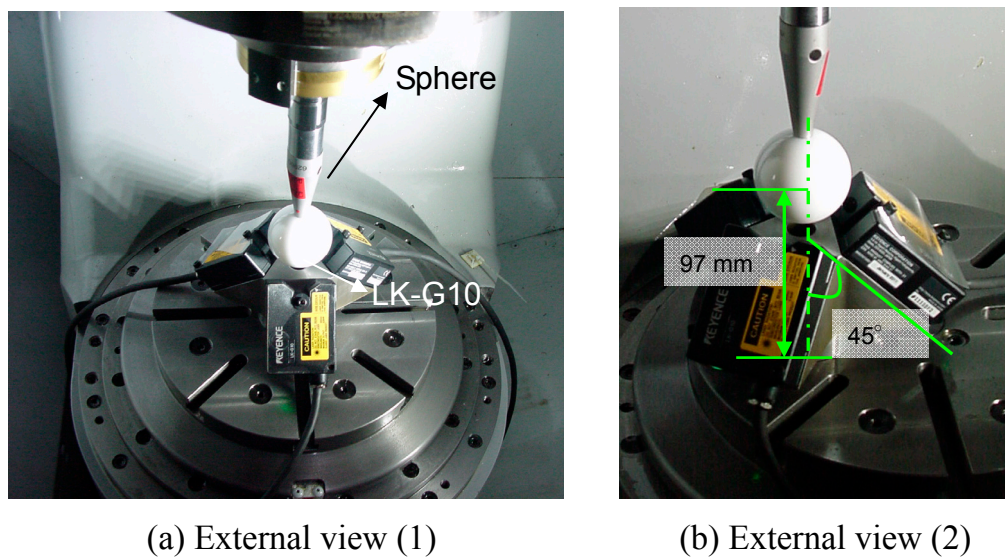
Non-contact R-test measurement device with three laser displacement sensors (LK-G10).
